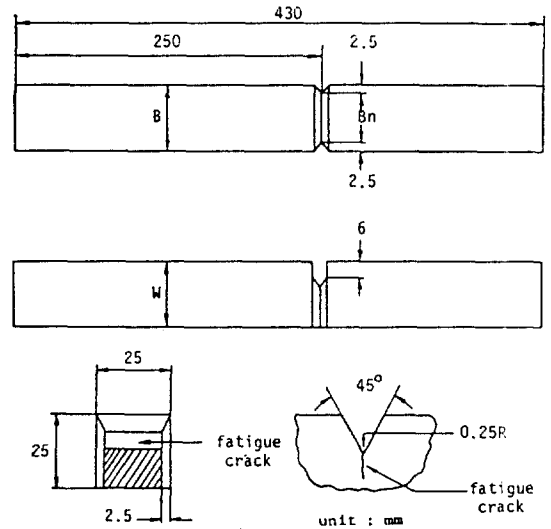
Cantilever beam specimen used for  $K_{ISCC}$  measurements.
